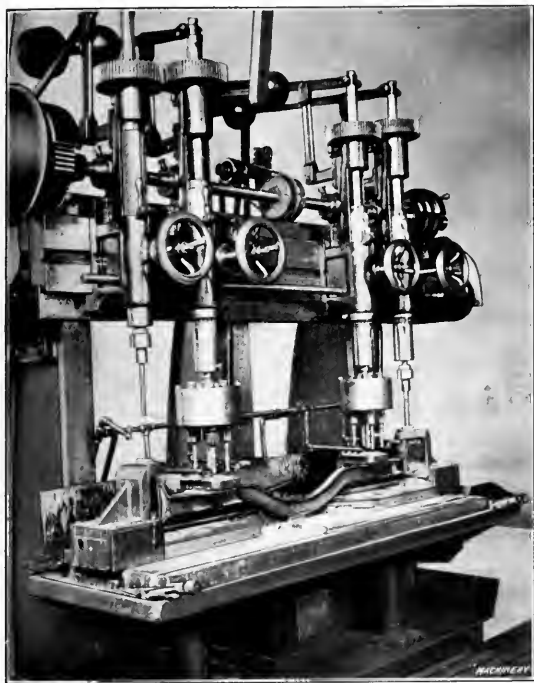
Drilling and Reaming the Holes in the Axle Ends and Spring Pads
